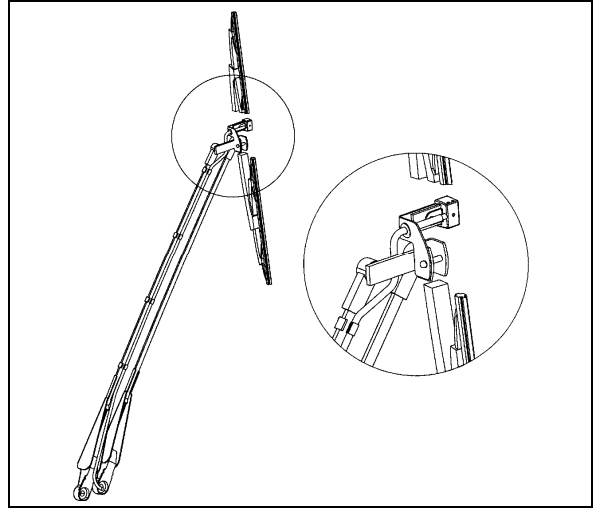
WINDSHIELD WIPER (DRIVER SIDE) 23328
